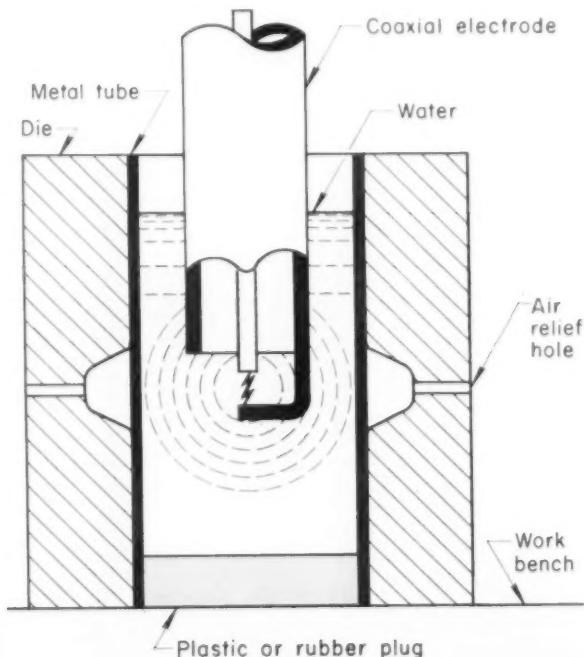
(right) Die-forming set-up to produce part in Fig. 4.
